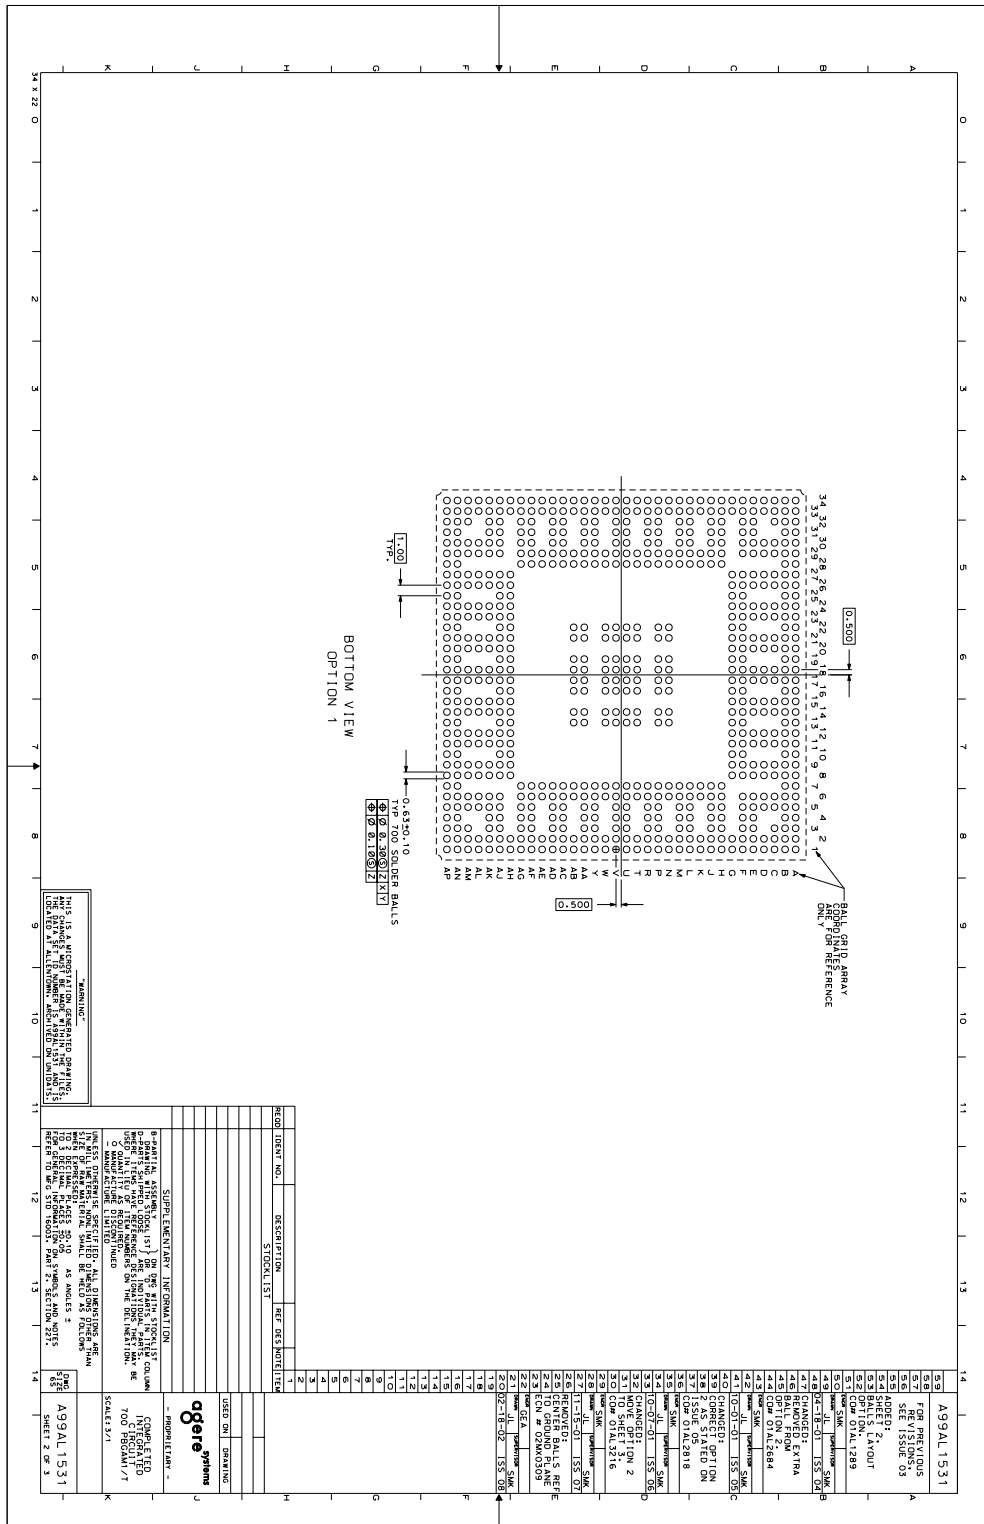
Bottom View of 700-Pin PBGA1T Balls Location
